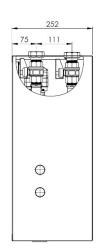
Dimensions of the hydraulic module AMB 900 and its connections [mm]
